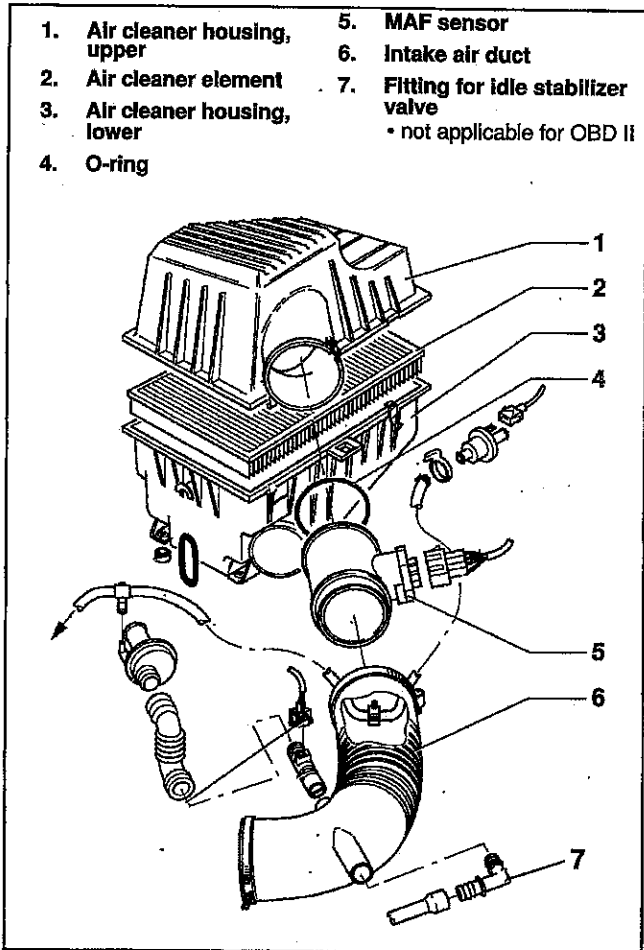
Mass air flow (MAF) sensor on 6-cylinder engine.
